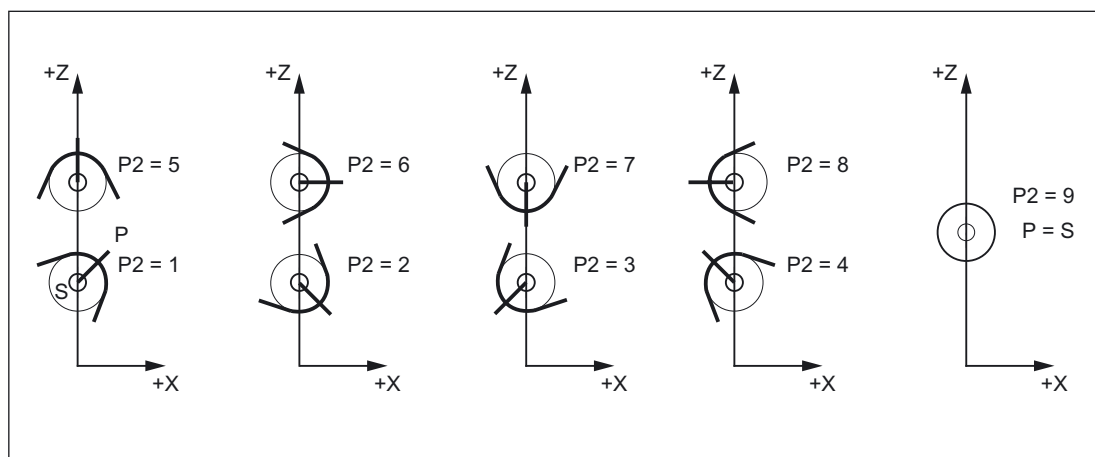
Tool parameter 2 (P2): Cutting edge position for vertical boring and turning mills
